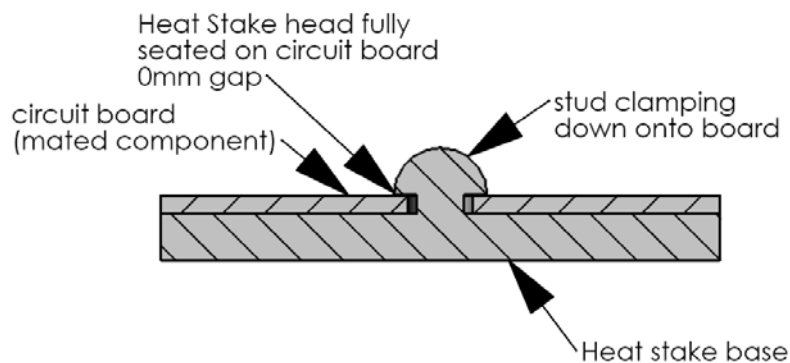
Joint cross-section depicting complete seating of heat stake head
